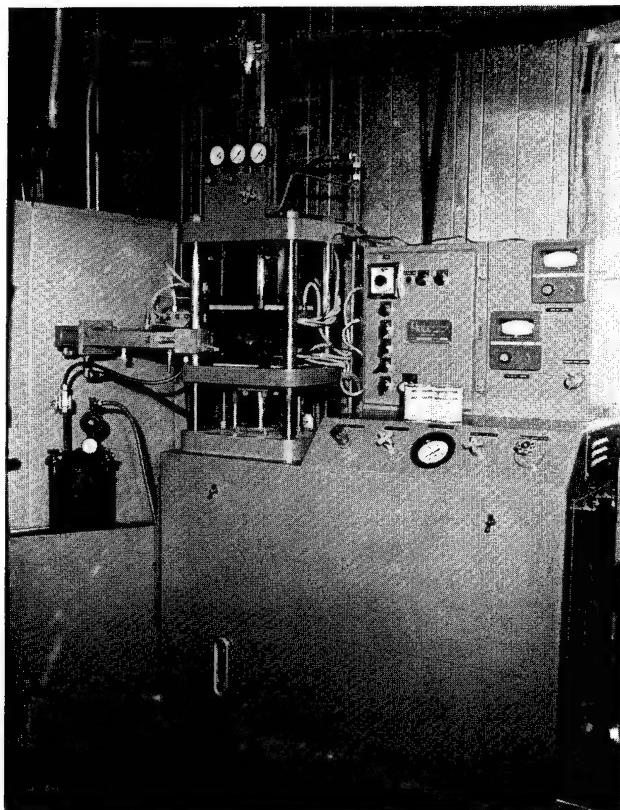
Small transfer press equipped with liquid resin injection system to inject on parting line of hand mold.
